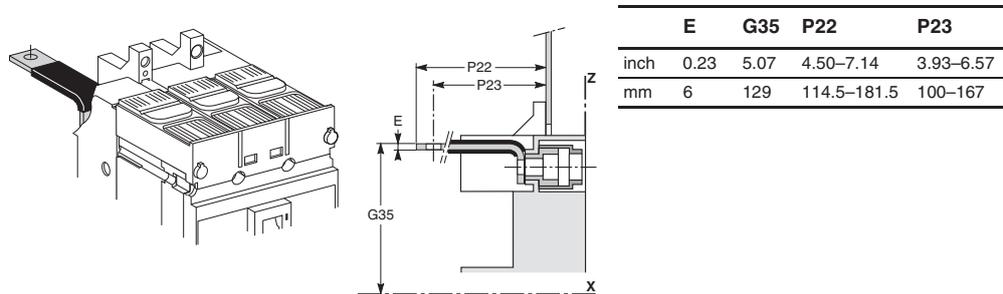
PowerPact L-Frame Circuit Breaker Plug-In or Drawout Mounting Connections
